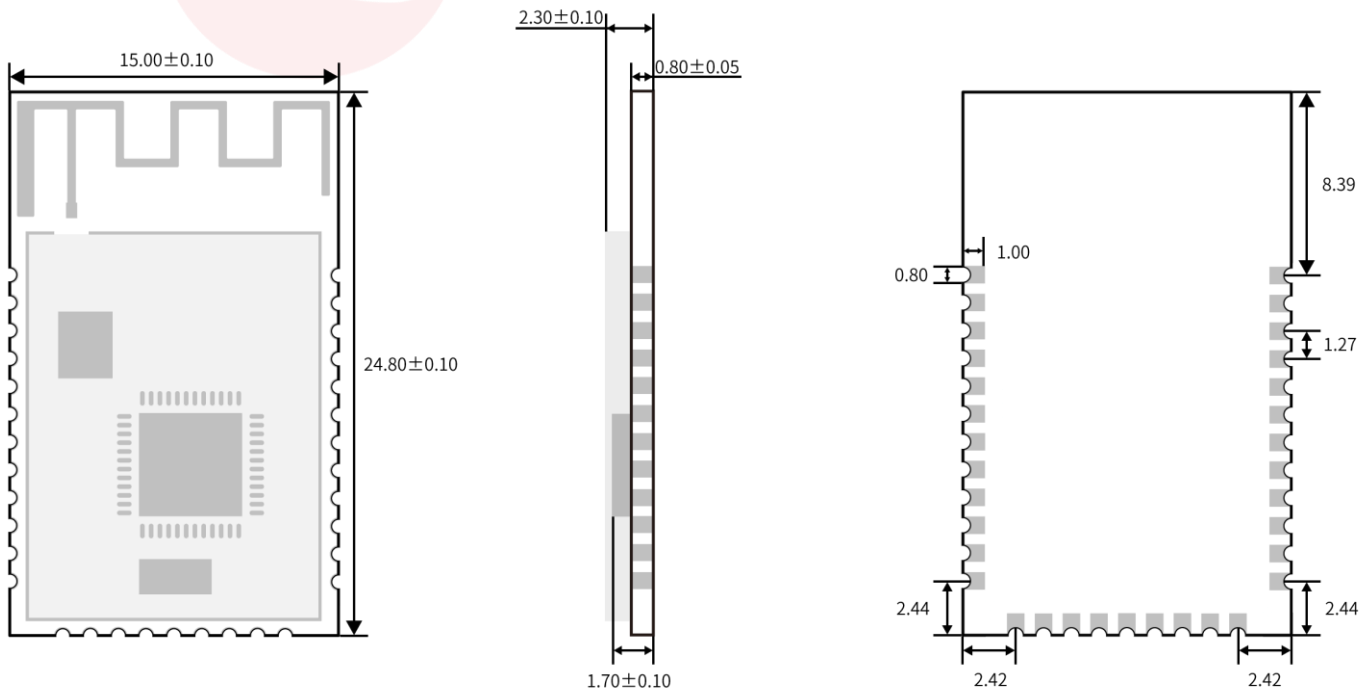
Recommended PCB Footprint of RF-BM-ND04 (mm)
